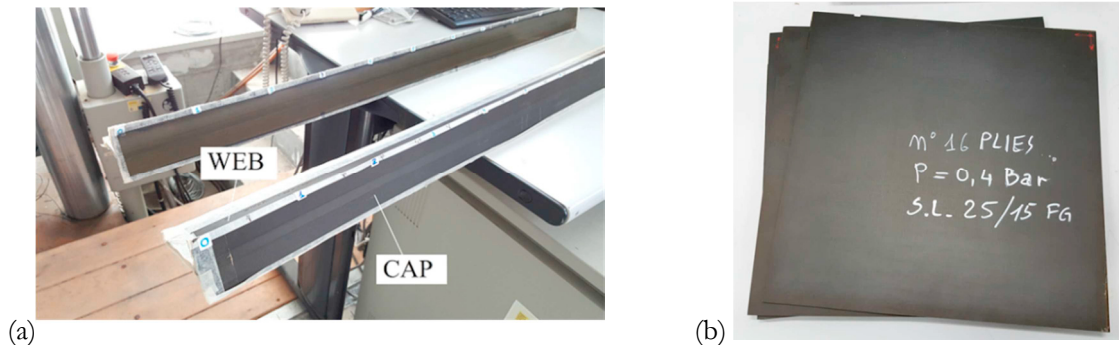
(a) stringers parts inspected (CAP and WEB); (b) laminate flat plate specimens.
